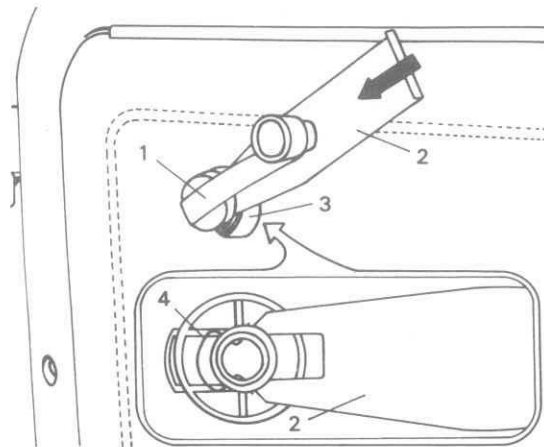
1 Tool A.78034 being used to remove the spring clip that secures the window regulator handle
